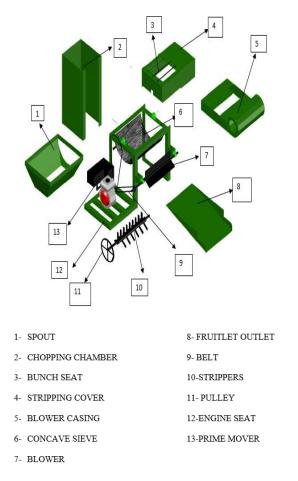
Exploded view of the Palm fruit bunch chopper and spikelet stripper
